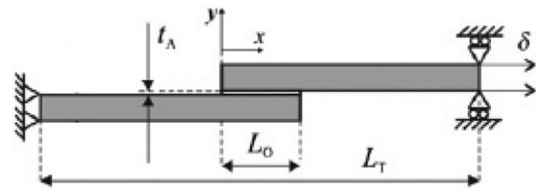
Geometry and dimensions of studied Single Lap Joint specimens [28].
